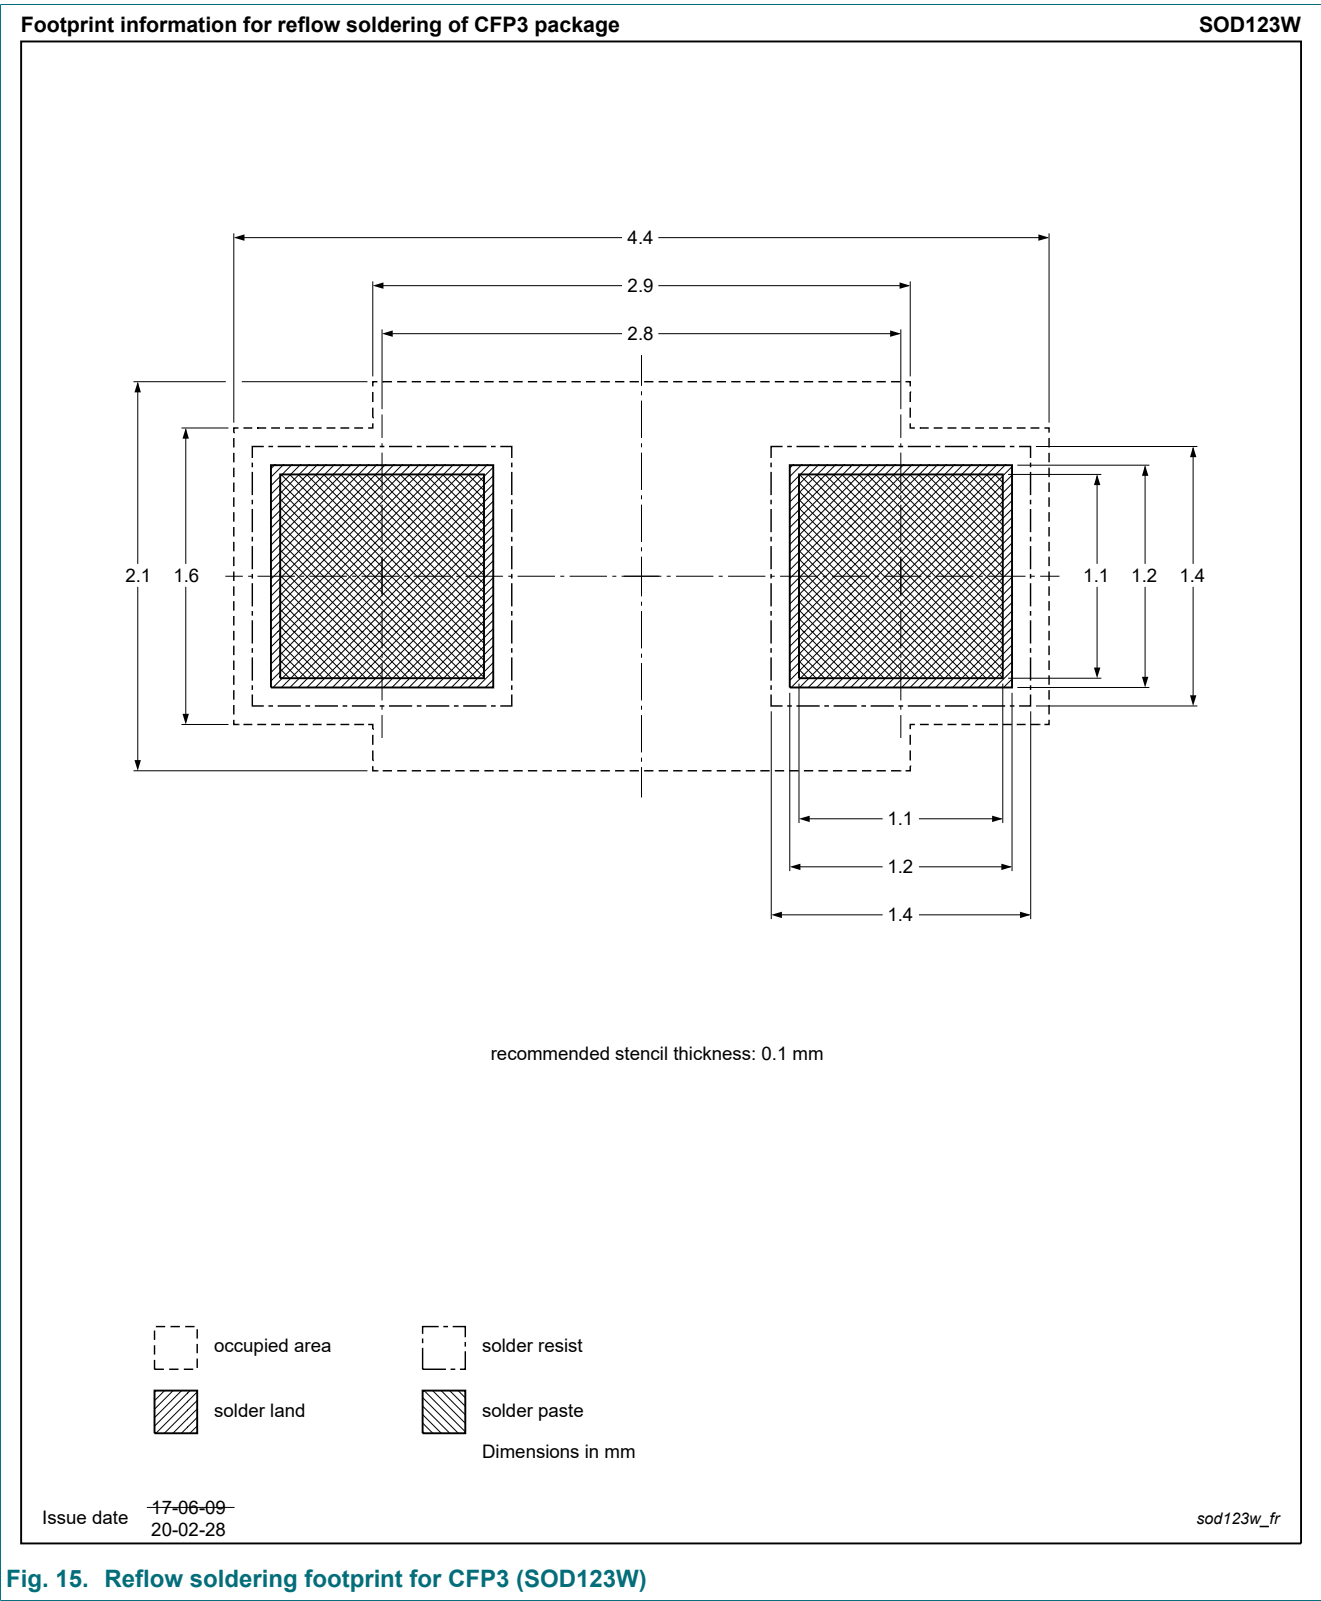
Reflow soldering footprint for CFP3 (SOD123W)
